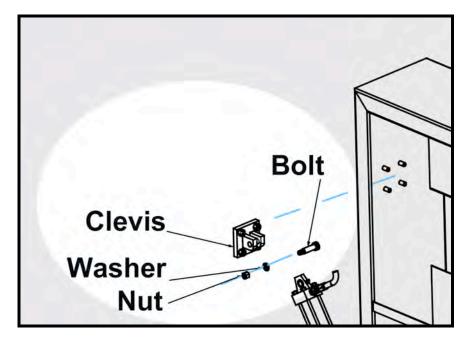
Hydraulic Cylinder Installation, Non-Control Cabinet
